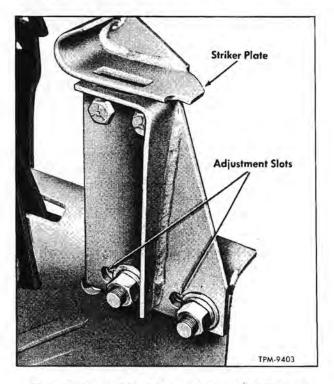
Radiator Latch Adjustable Bracket-8 Cylinder
